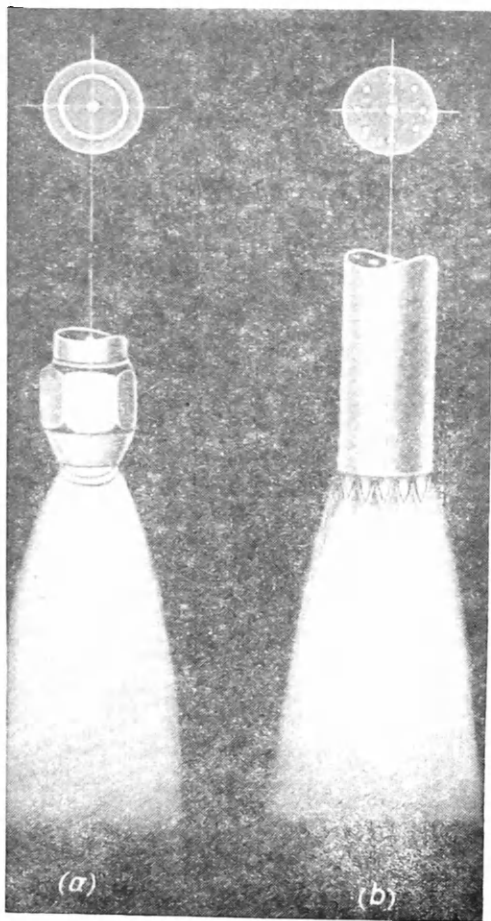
Single-row multi-lane torches for welding and flame hardening:
